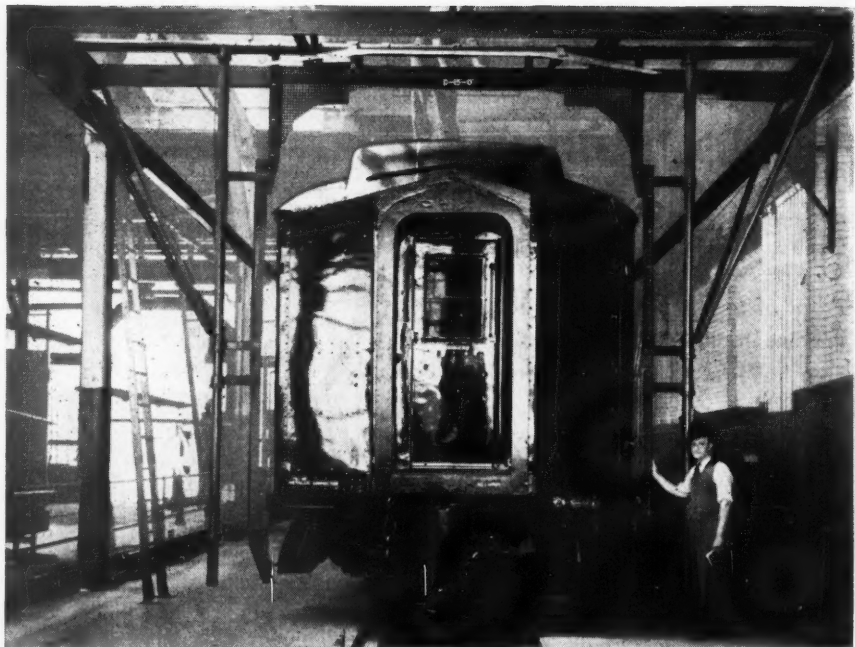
Rebuilt cars are tested for side and top clearance with the gauges shown here.
